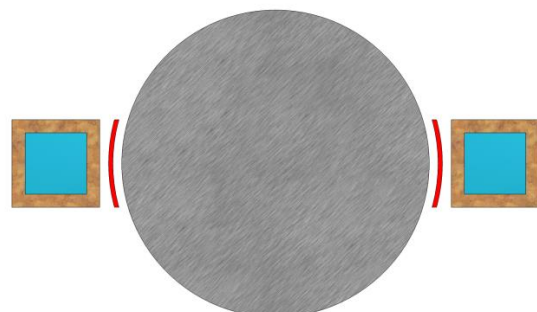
Cross-section of single-shot coil and workpiece. Red lines expose geometrical superimposing zone
